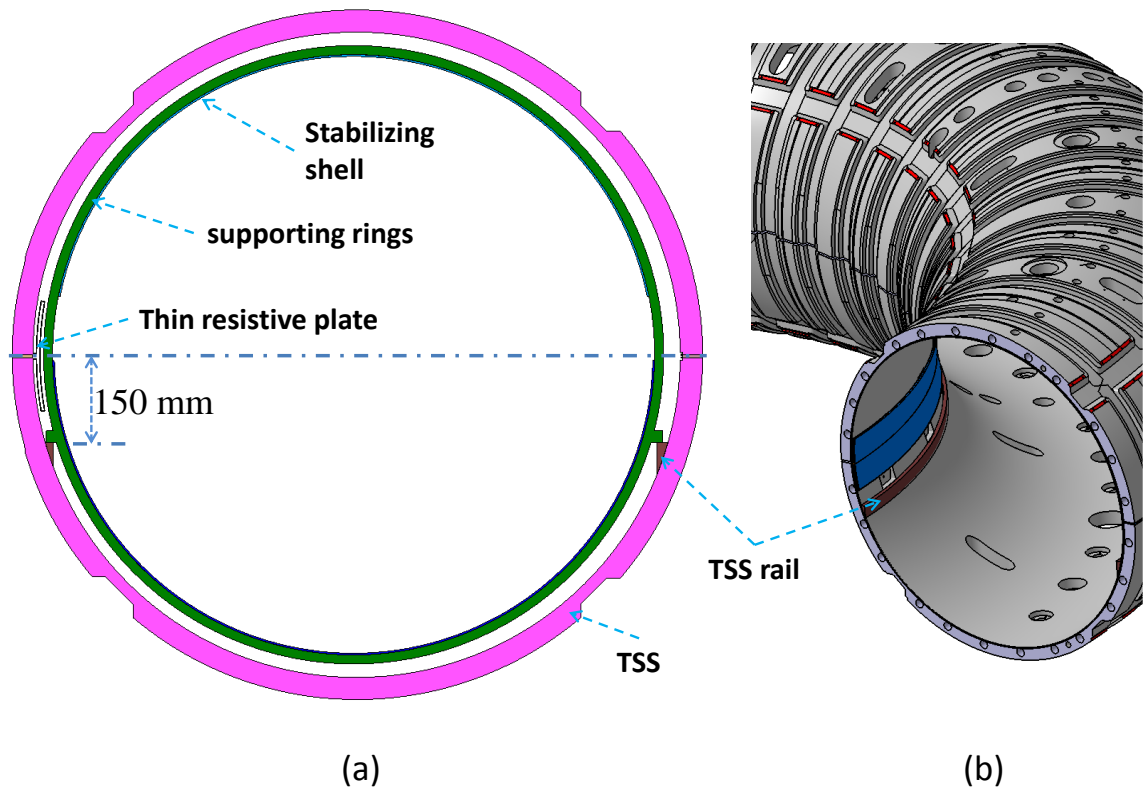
TSS rails (a) Poloidal sectional view (b) Isometric view
